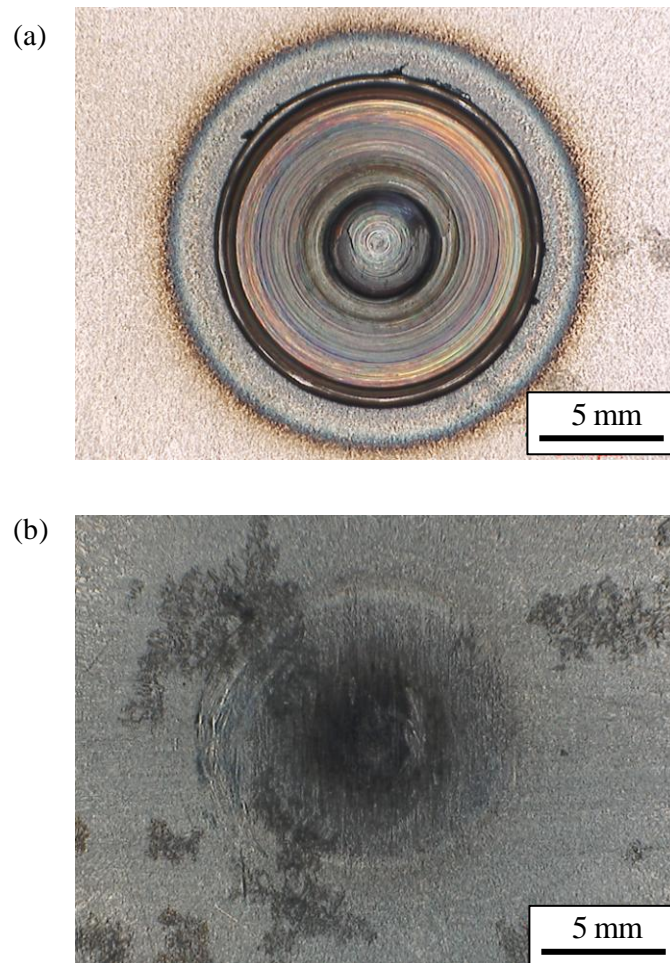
The welded region: (a) The front side of upper sheet, (b) Rear side of lower sheet.
